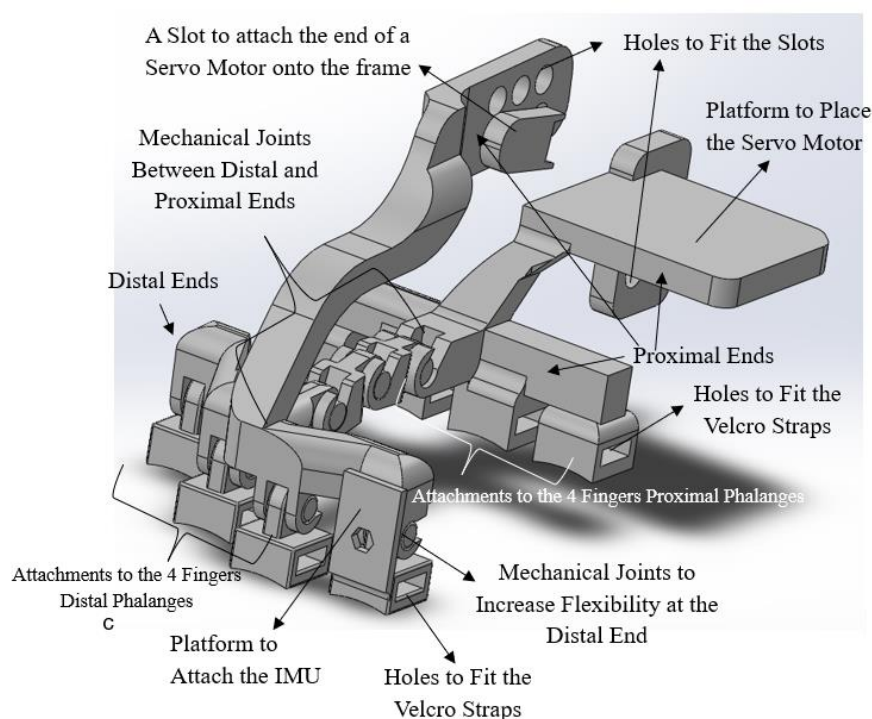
Drawing of Finalised 4 Fingers Part in Isometric View.
